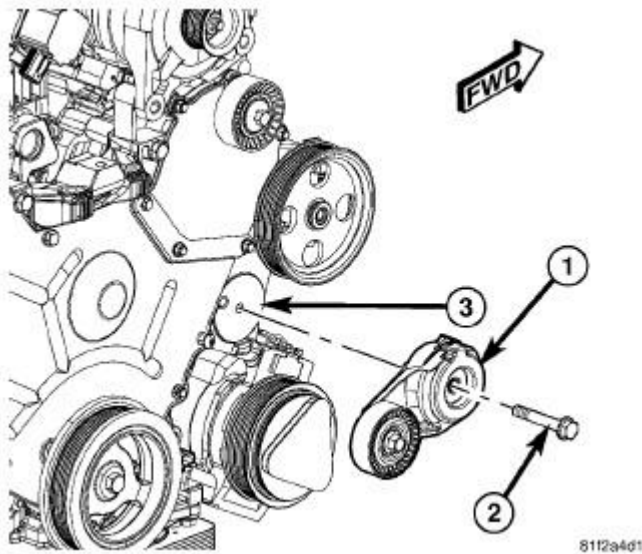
Accessory Drive Belt Tensioner - 3.5L
